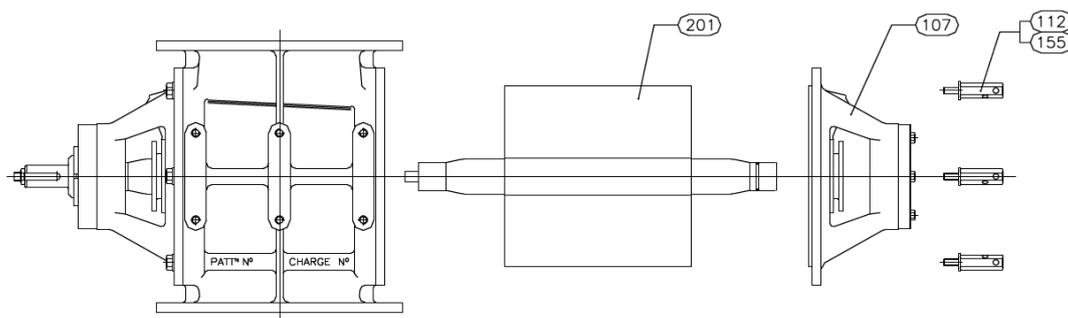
Dismantling easy detachable execution (for cleaning)
